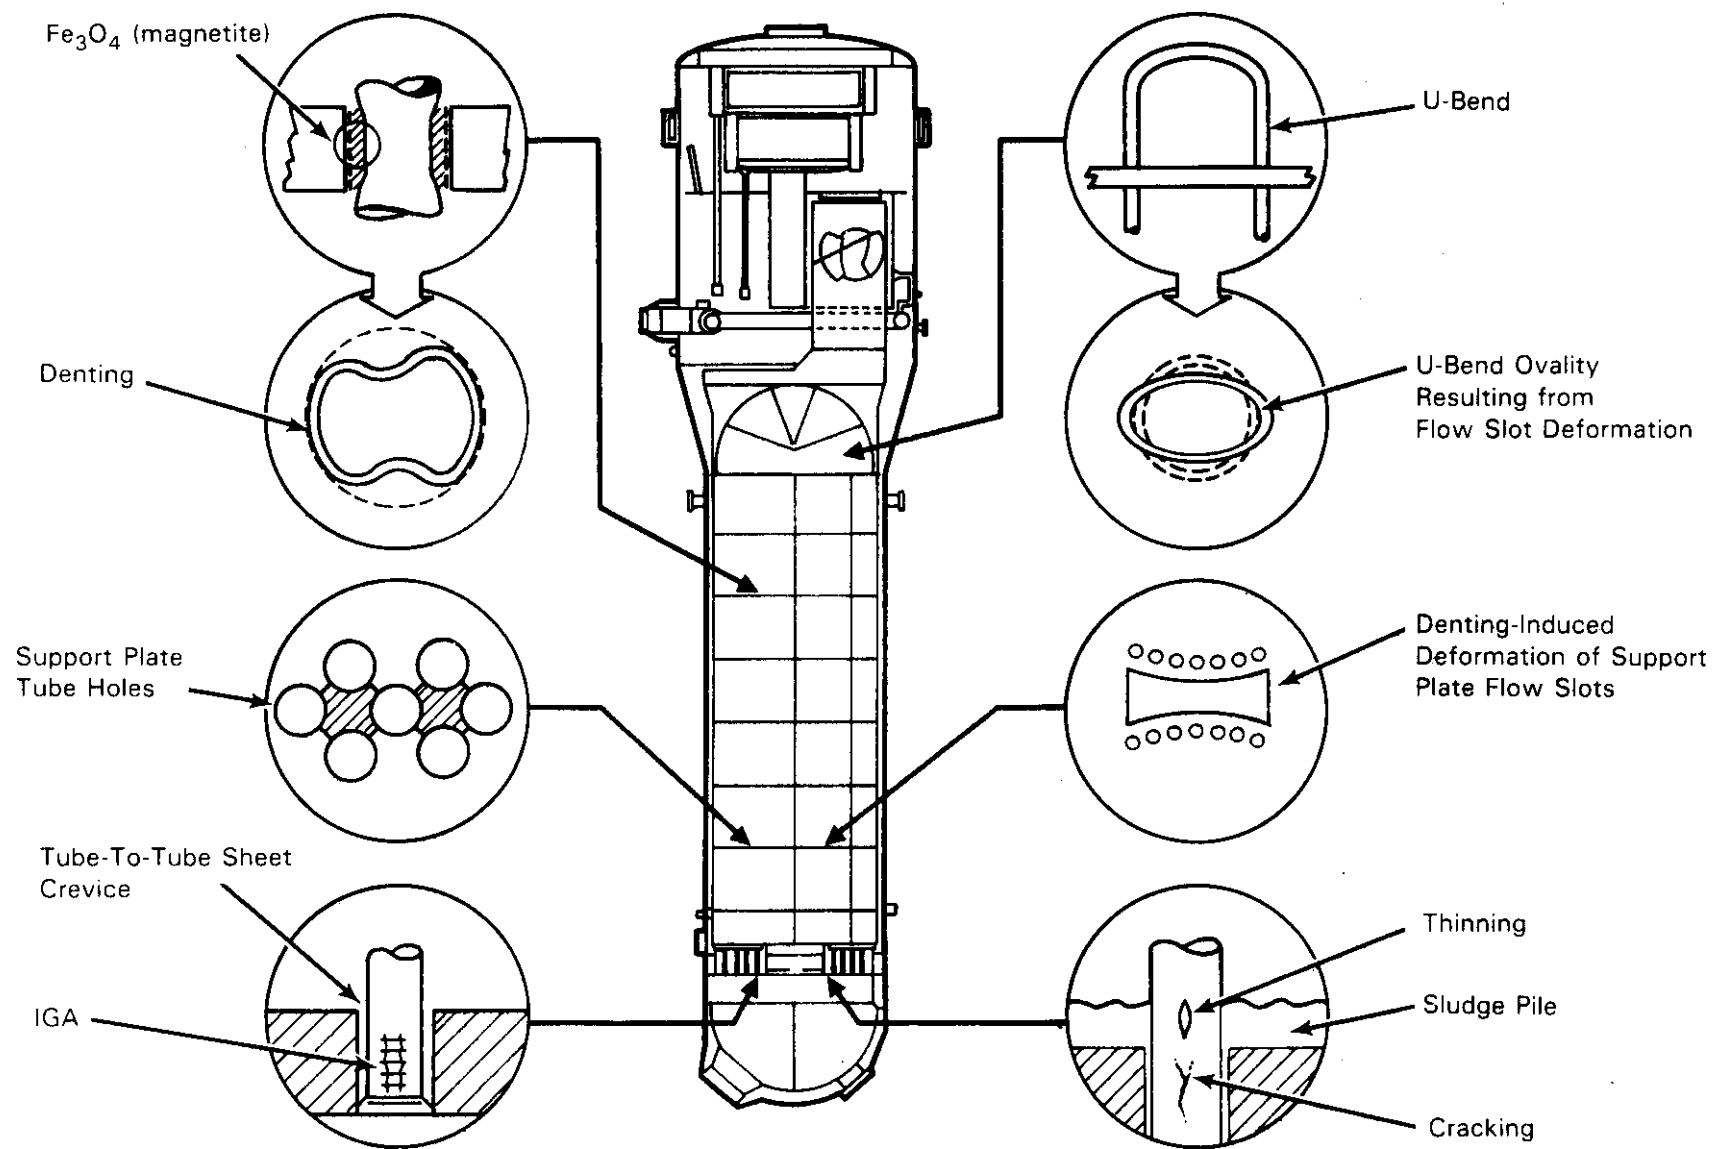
Typical Defect Types and Locations Identified for Recirculating-Type Steam Generators
